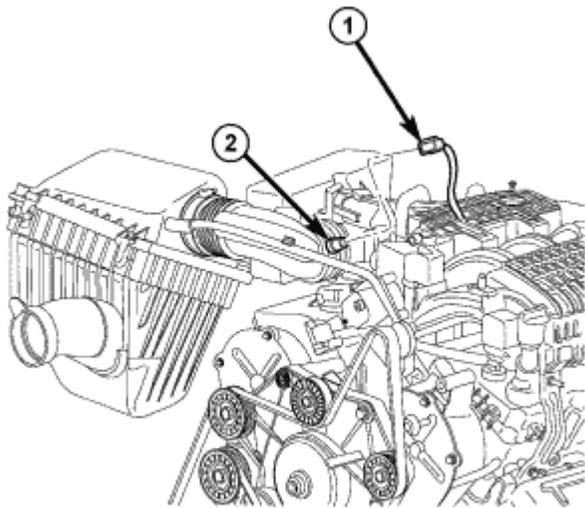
Identifying Intake Manifold Air Temperature (IAT) Sensor & Electrical Connector
